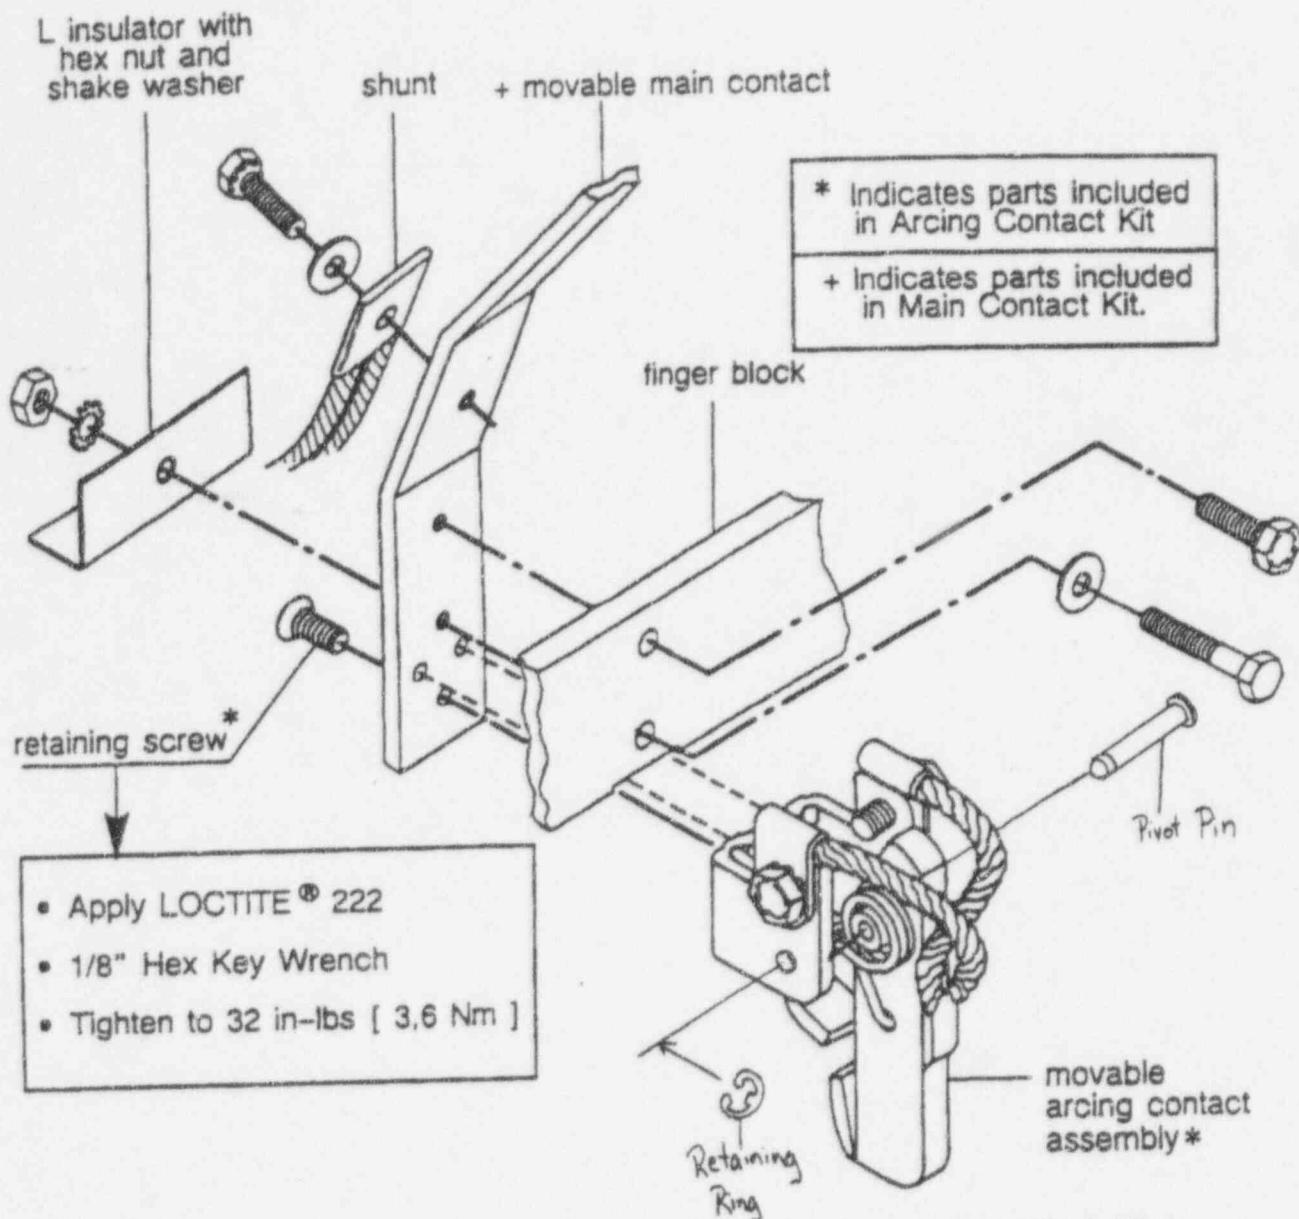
Arcing and Main Movable Contact Assembly (one pole shown) 300 & 600 A
